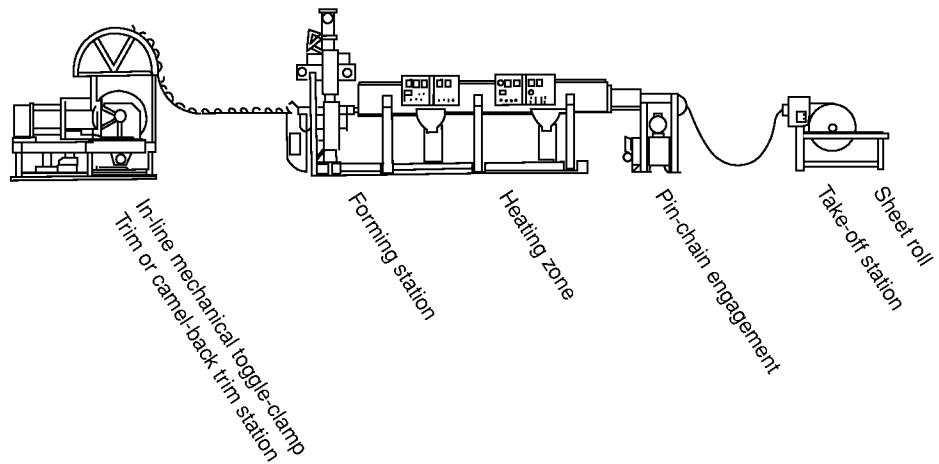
Schematic of large thin-gauge thermoforming machine (Battenfeld—Glouster, Glouster, Mass.) (12). Used with permission of Hanser Publications.
